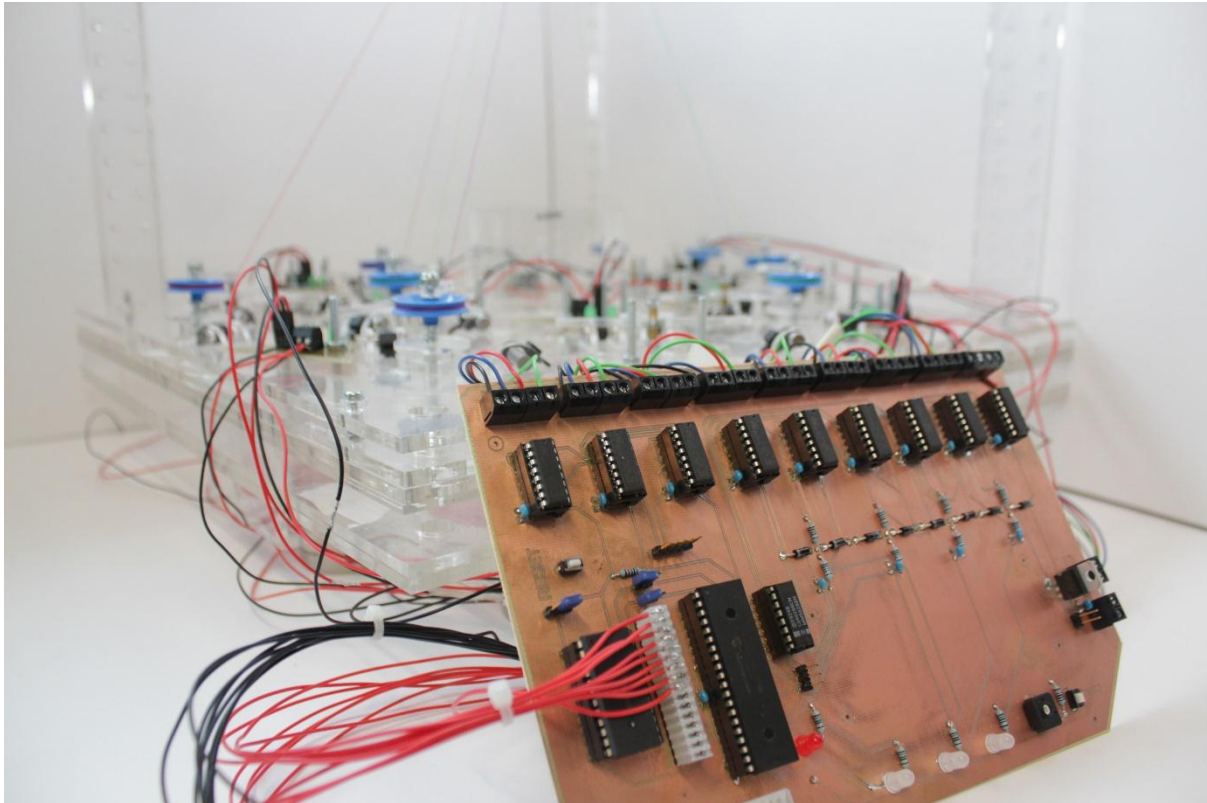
Improved weaving apparatus populated printed circuit board
